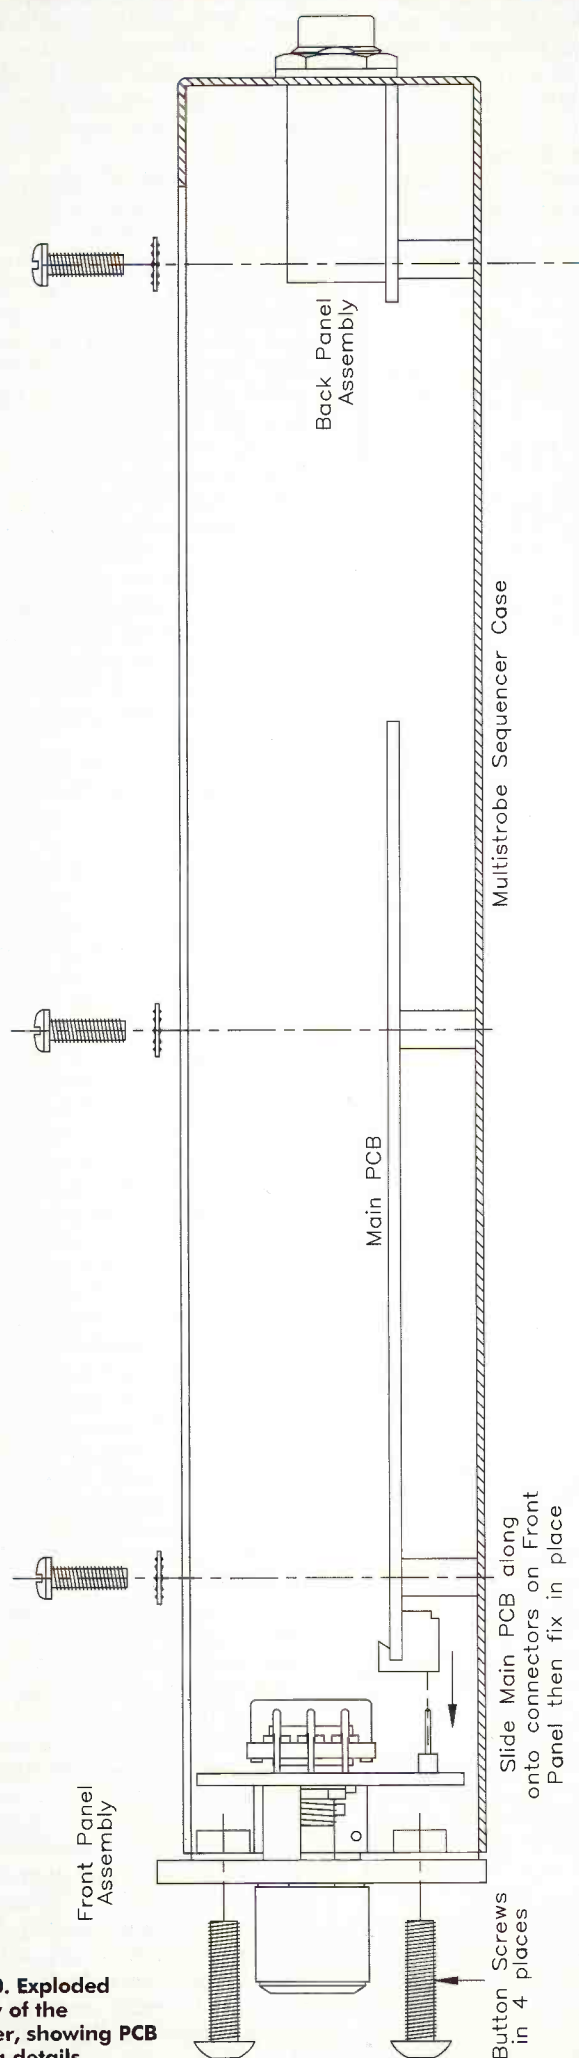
Exploded assembly of the Sequencer, showing PCB mounting details.
